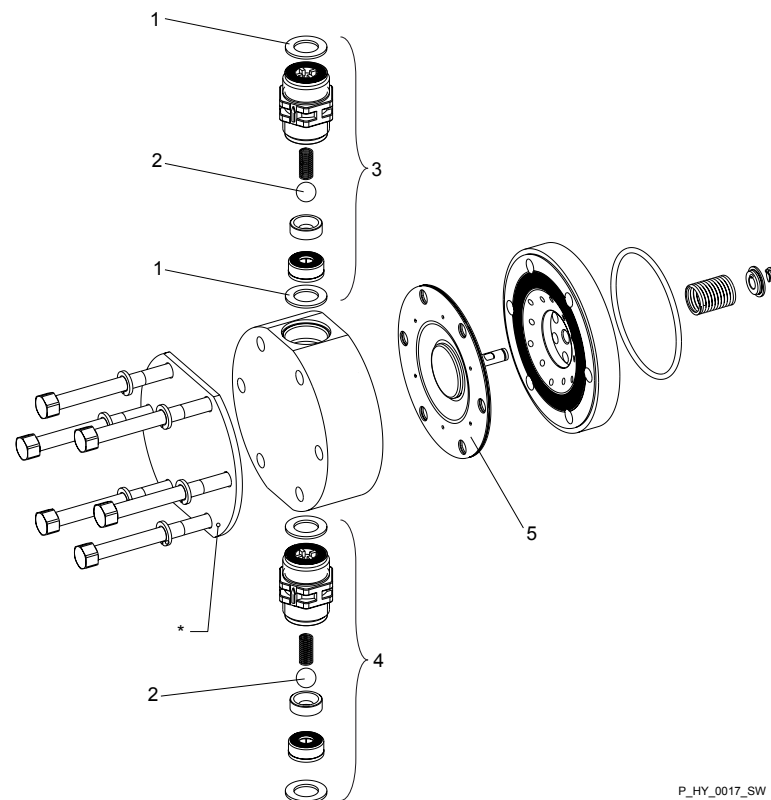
Exploded view of Hydro liquid end. Numbered positions = scope of delivery of PVT spare parts kit. Technical changes reserved.
